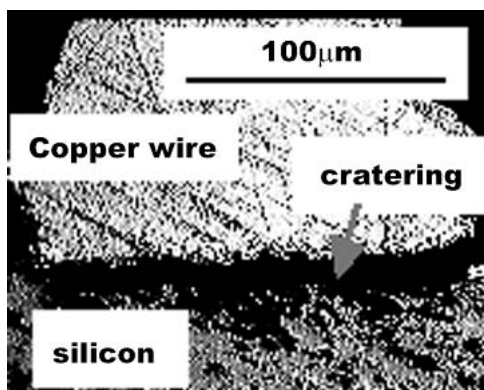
A cross-section of a copper wire bonded to Al pad shows cratering occurs under the bond. The wire is slightly lifted and cratering could be seen after chemical etching.
